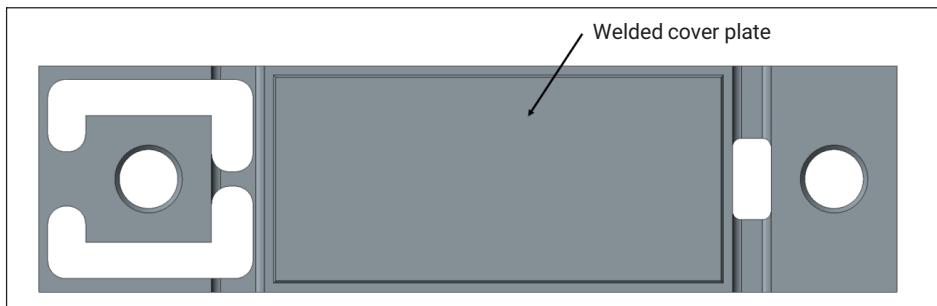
Hermetically welded cover plate on the top of the transducer
